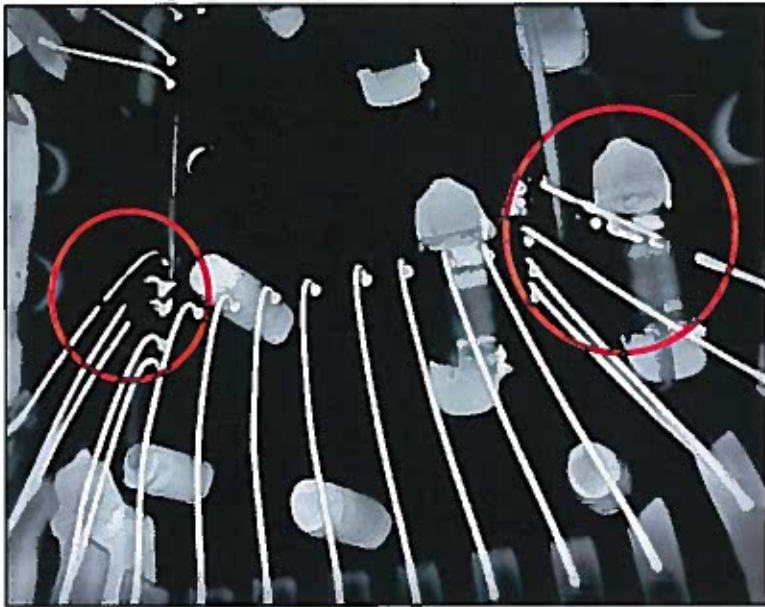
Different View of Reconstructed Failed IC Bond Wires from Fire Damaged DVD.
